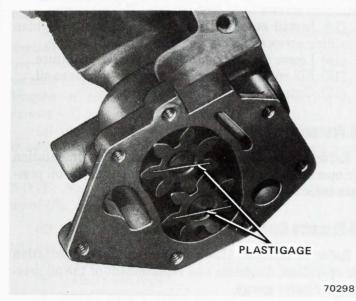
Oil Pump Gear End Clearance Measurement—Plastigage Method
